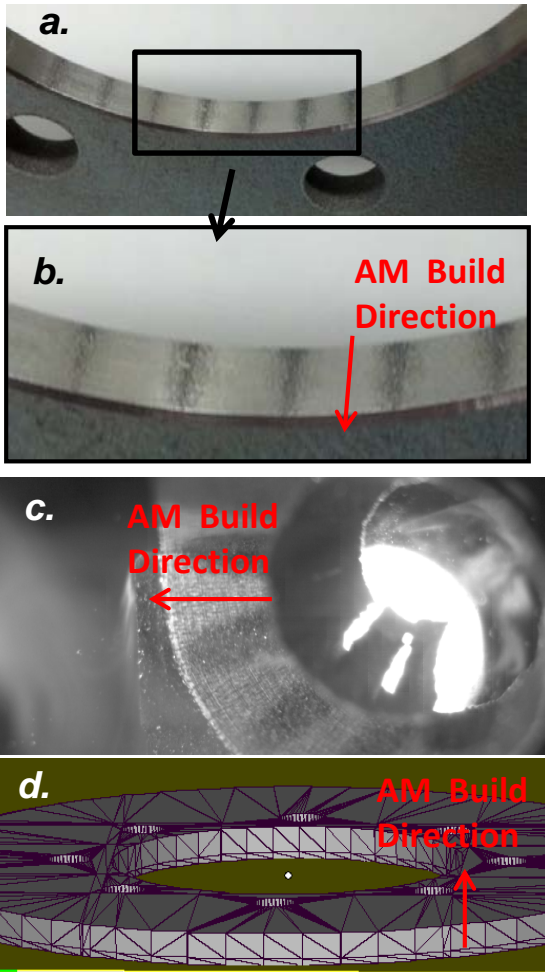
a. Lathe turned inner diameter of the workpiece showing light/dark striations. b. Enhanced view of striations on the workpiece. c. Striations appearing on the chip surface in high speed video (Test 3, frame 3154) and the relation to the build direction. d. STEP file of disk showing tessellated facets on the inner and outer periphery.
